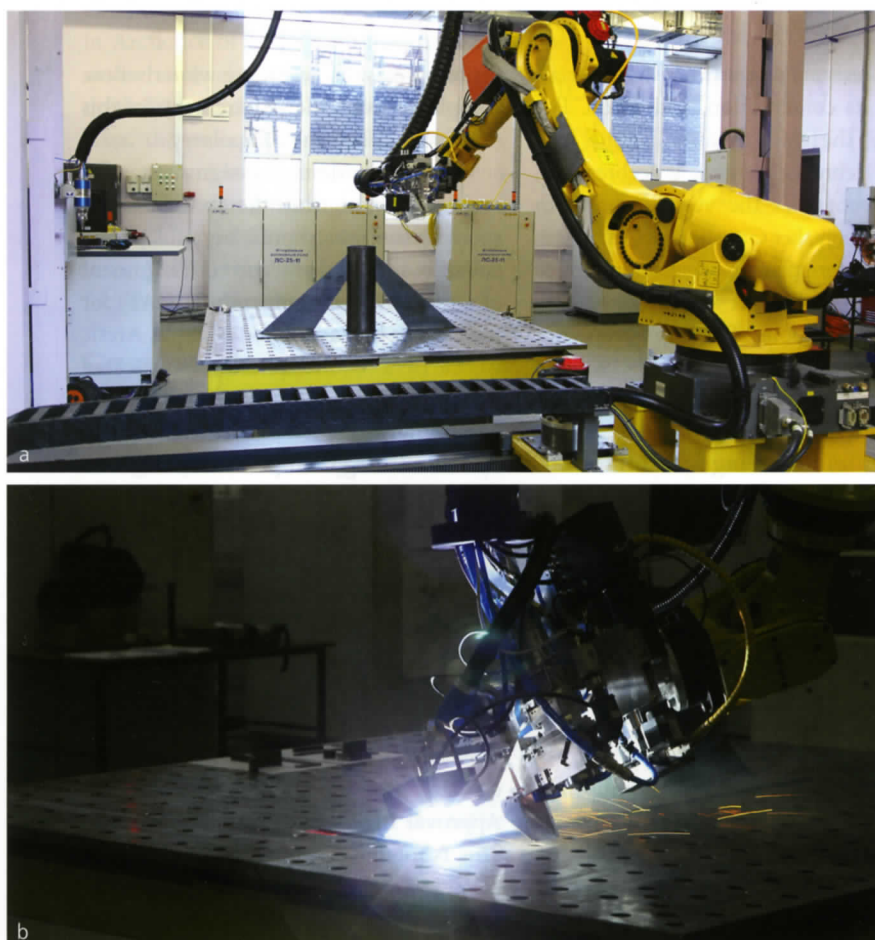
Robotized complex for laser welding and cutting in various positions: overall view (a), laser-arc welding process (b)
